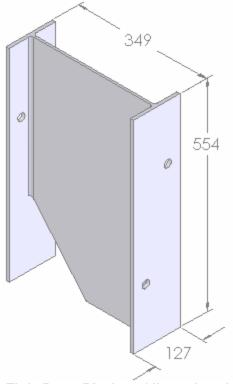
Thrie Beam Blockout (dimensions in millimeters)
